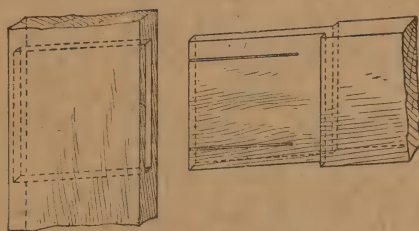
Mortise-and-tenon Joint in Back Frame
